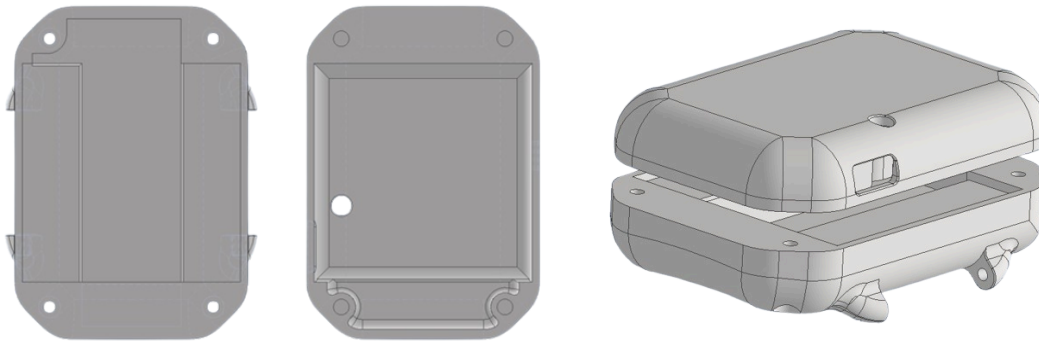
left: Top view top and bottom case parts, right: Opened view of the case parts
